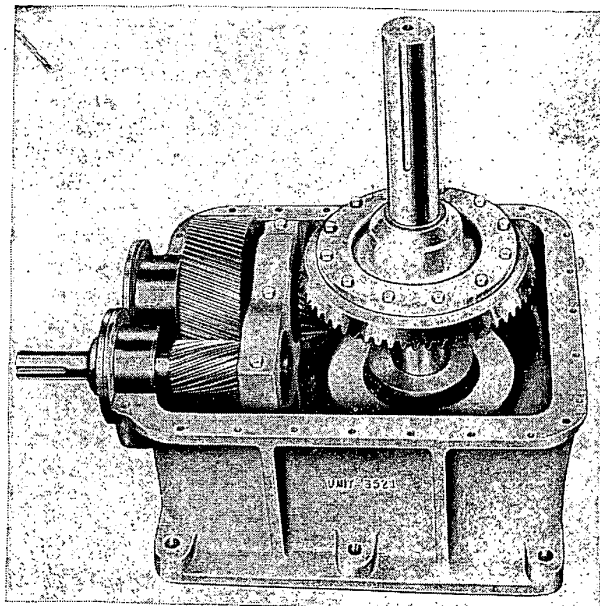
Double-reduction unit with a bevel second reduction. (Courtesy of Philadelphia Gear Corp.)
